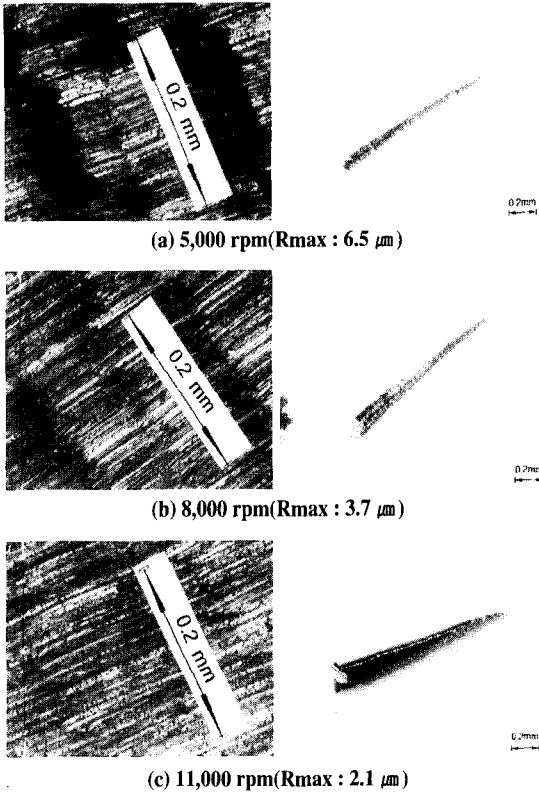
Machined surface and Chips for each cutting speeds (after 34m of cutting)
